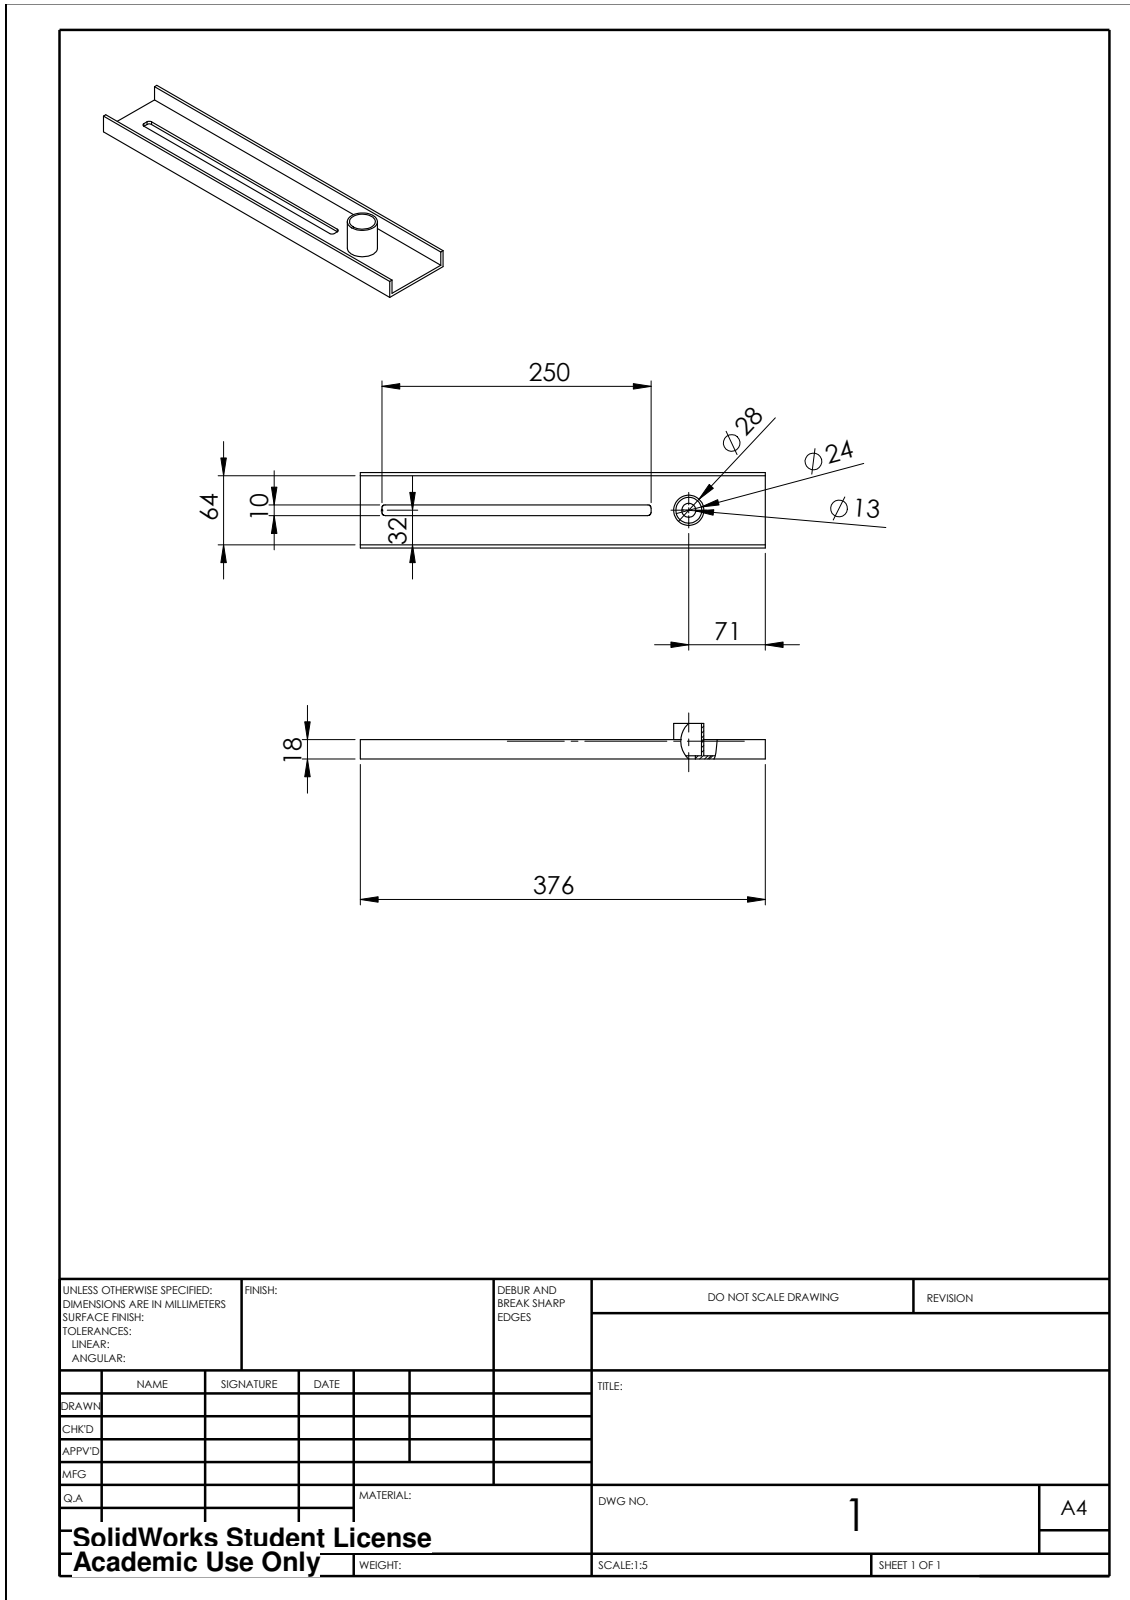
Technical drawing of the part that allows the movement along the x axis.
